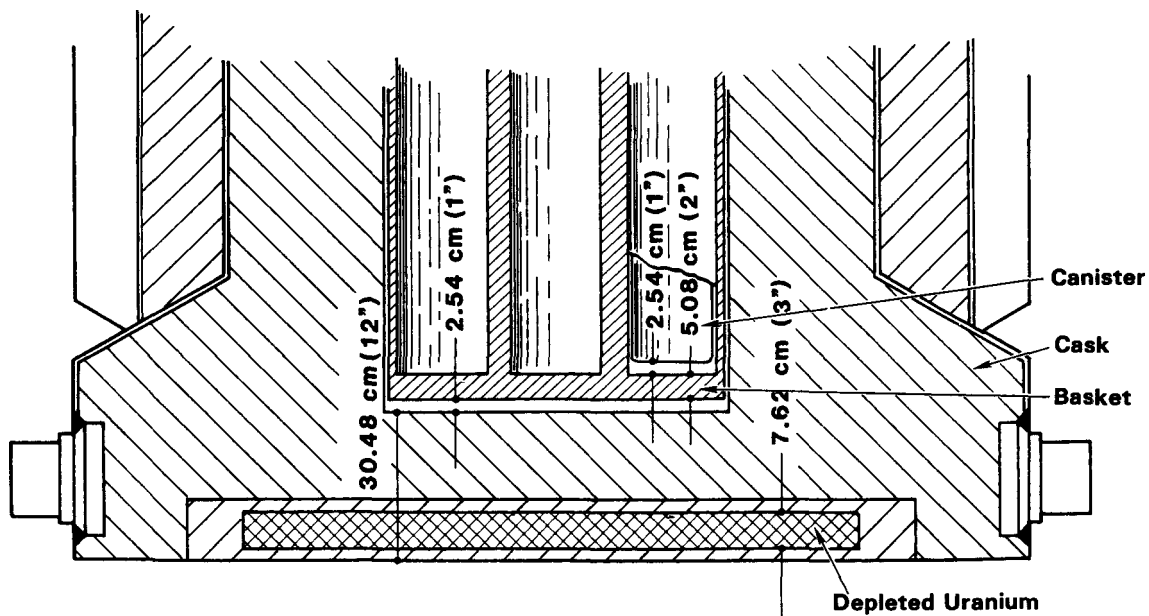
Schematic of Cask Bottom End for Initial Shielding Calculations
